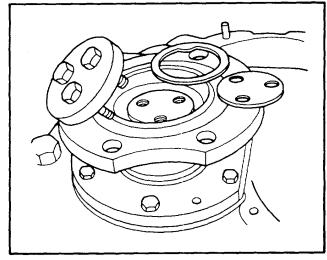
Output flange, retainer washer and rubber ring removed.
